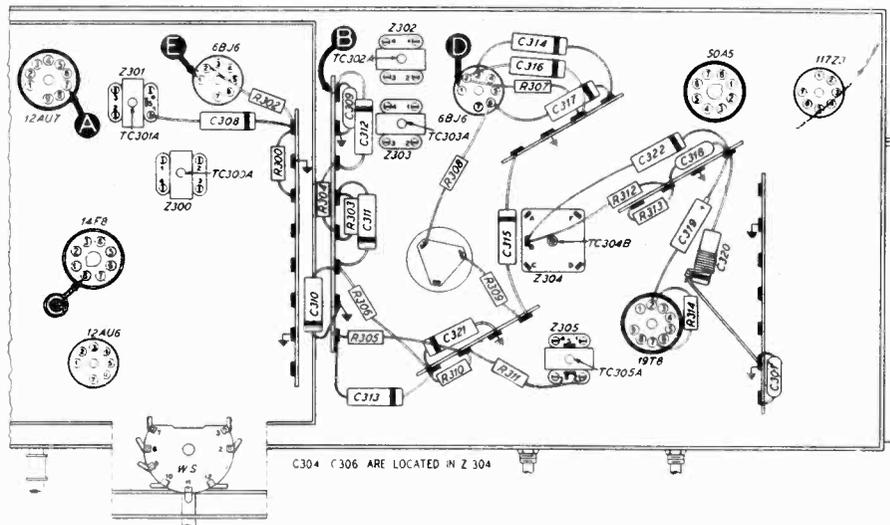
Bottom View, Showing Section 3 Test Points TP-5398C
